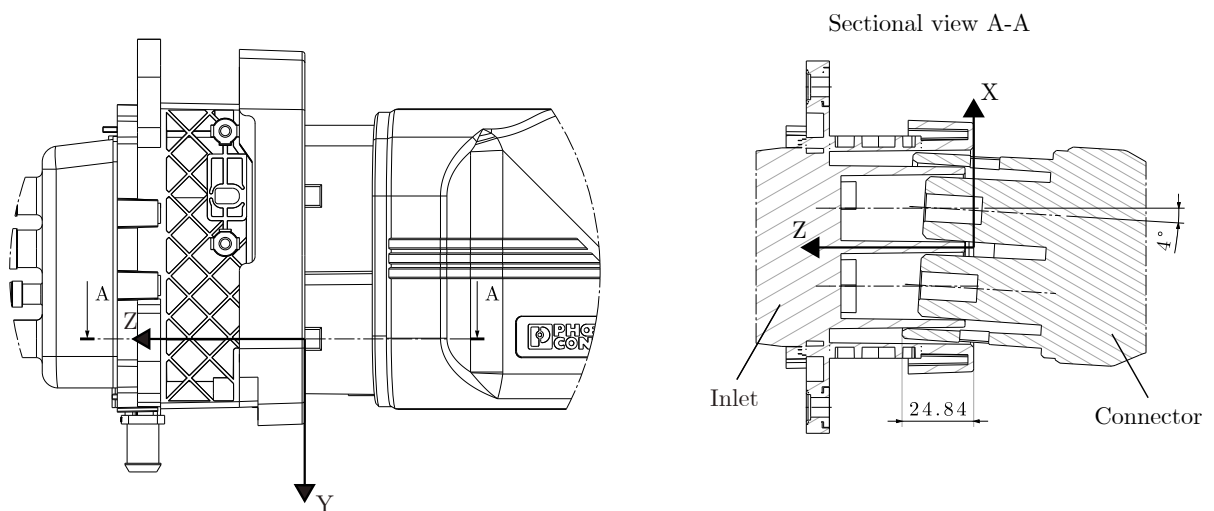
Left: Side view of connected inlet and connector CAD-models. Right: Sectional view A-A of with a Y -axis rotation displacement of 4° .
